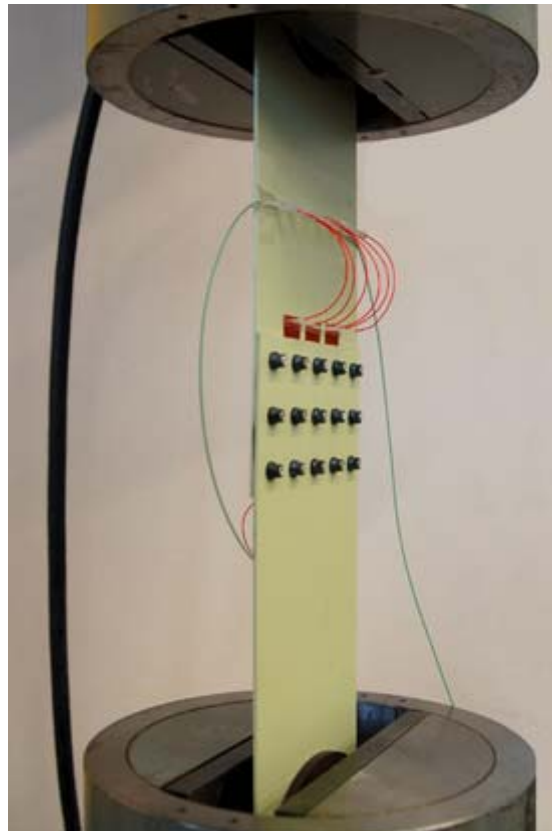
Riveted GLARE longitudinal joint specimen with integrated vacuum foil sensors
